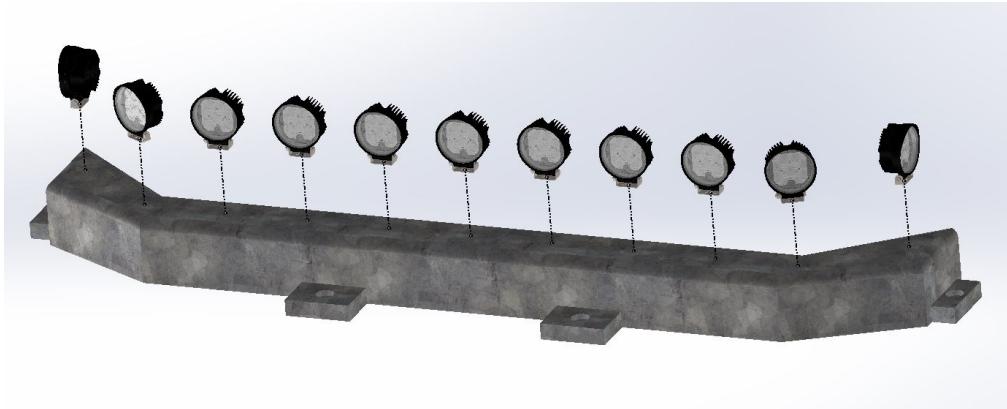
Sackett, Justin: Assembly Step 1
